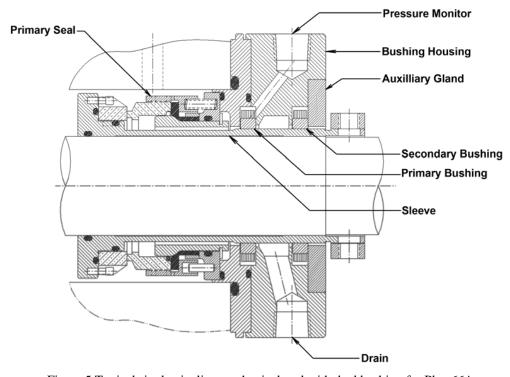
Typical single pipeline mechanical seal with dual bushing for Plan 66A
